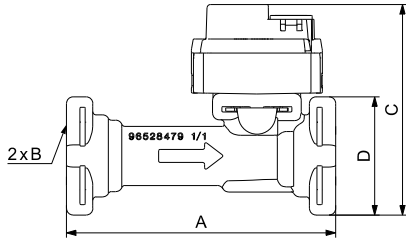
Dimensions, VFS, 1-20 l/min, without adapter
